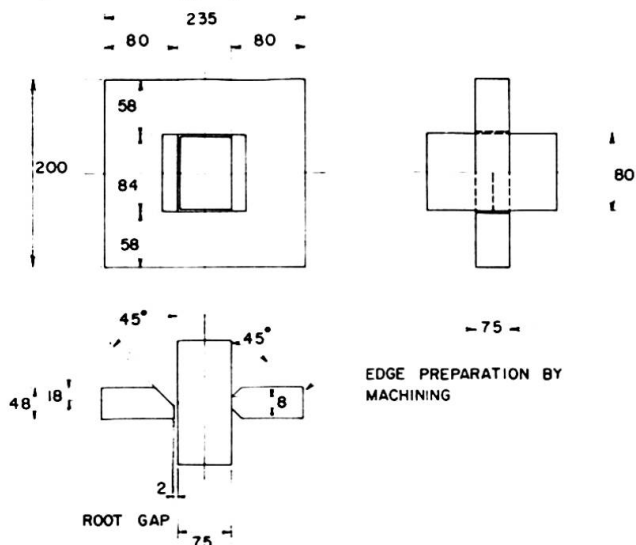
DETAILS OF RESTRAINT CRACK TEST SPECIMEN
